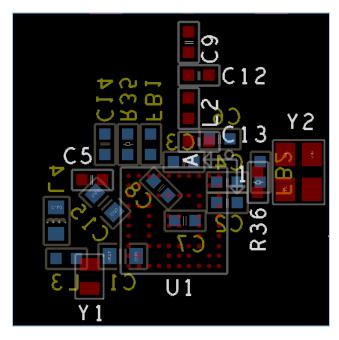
Power supply of GR5515RGBD PCB (reference)
